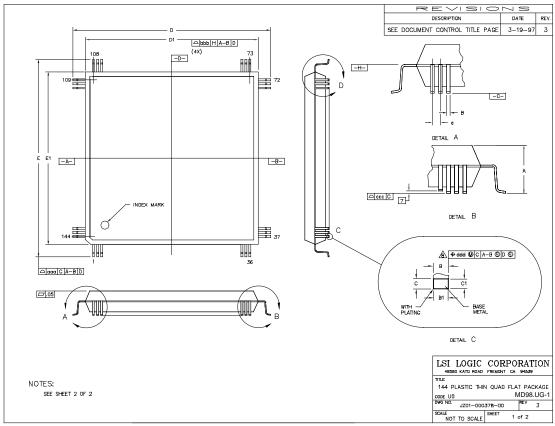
144-pin TQFP (UG) Mechanical Drawing
